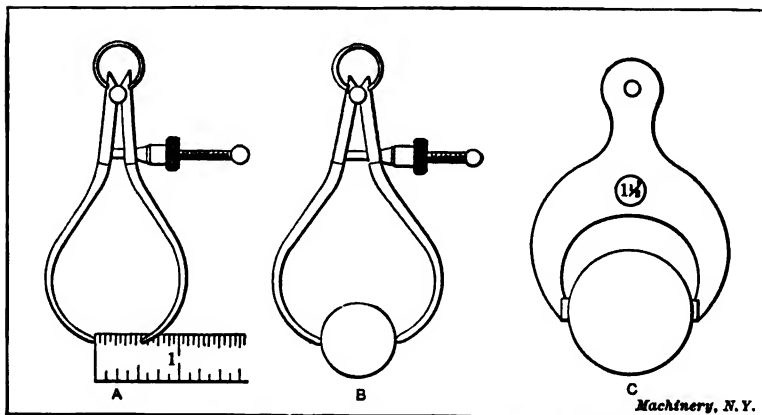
Setting Calipers by Scale—Setting by Gage—Fixed Gage
